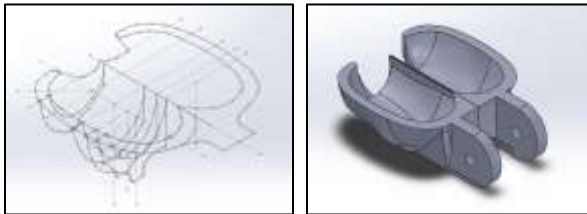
(a) Slices from the Drawing Forming the Bucket's Frame and (b) Final 3D Model of the Traditional Pelton Bucket with Holders
